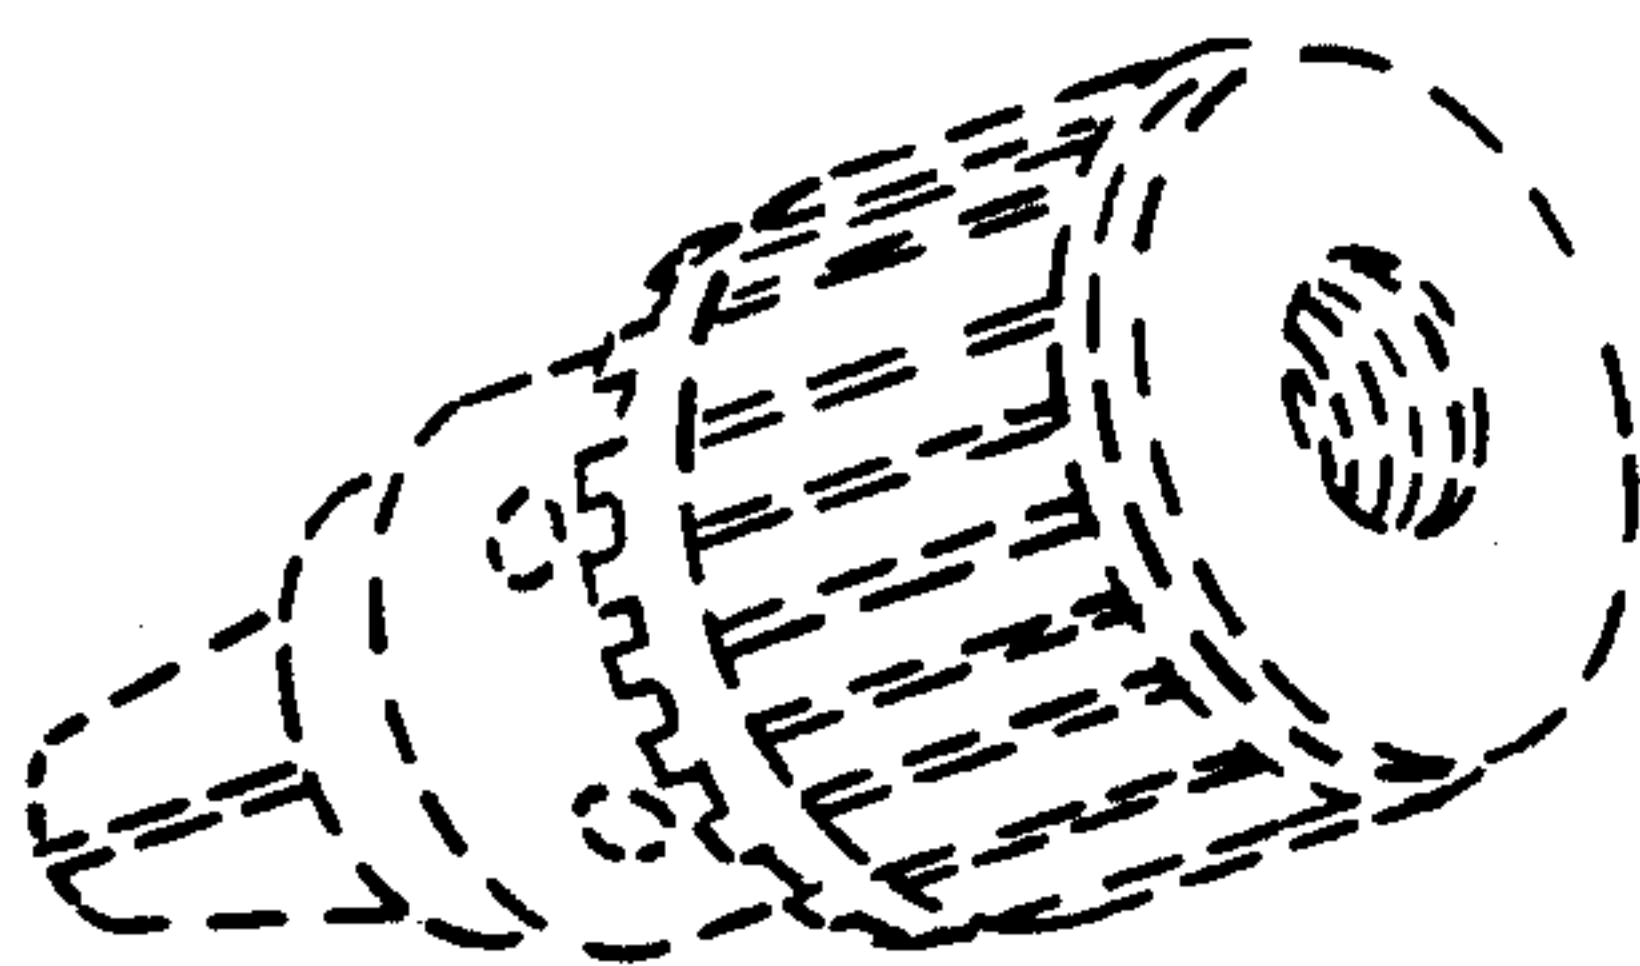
is a rear and left-side perspective view of a ratchet adapter for a drill chuck showing my new design, the broken lines being for environmental purposes only and forming no part of the claimed design;
